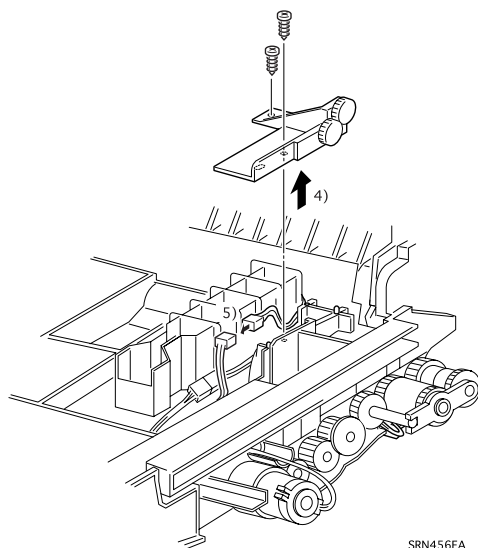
PRE-REGI. CLUTCH Removal (1/2)
